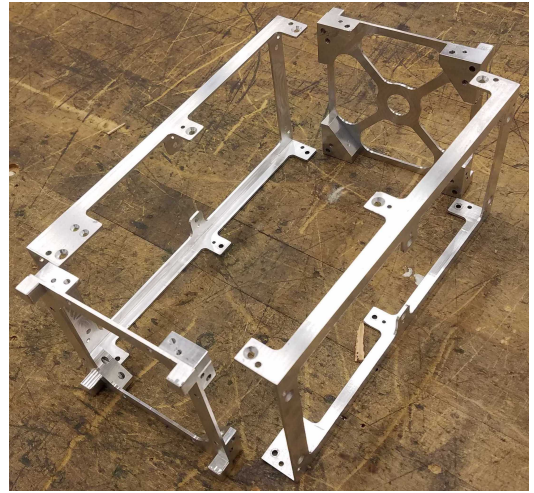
Prototype rail walls and endplates have been machined by students in the UW Mechanical Engineering machine shop.
